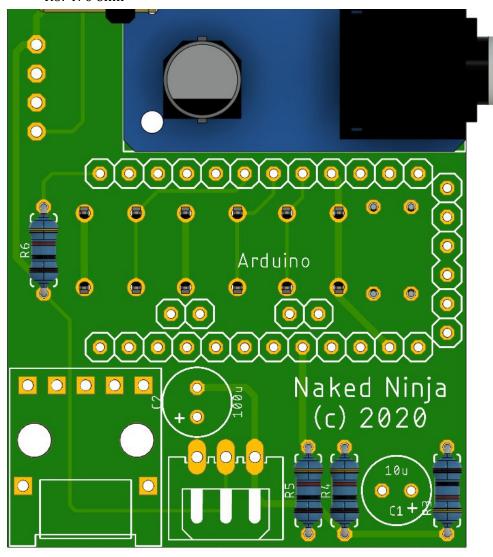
Front view of VU Stick V1.2 PCB zoomed in on the TEA576 connections
